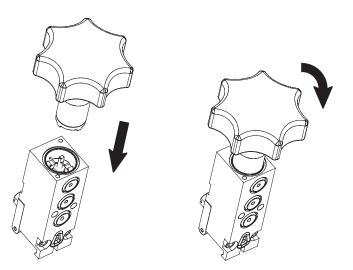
Using the cartridge tool to tighten the cartridge assembly
